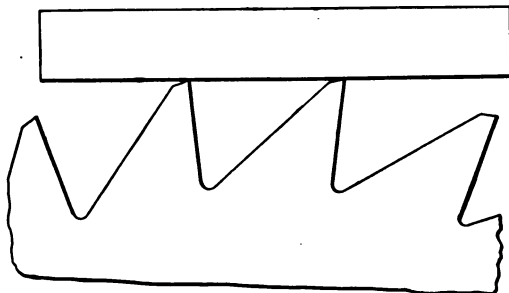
Gauging the Clearance by Means of a Straight Edge
